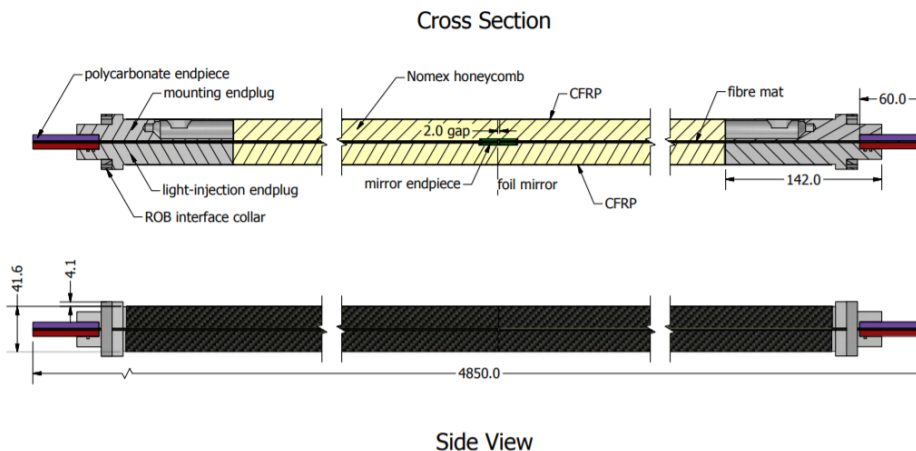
Cross sectional view through the centre of a module with fibre mats enclosed by honeycomb structure, carbon fibre skins and mounting endplugs [67].
